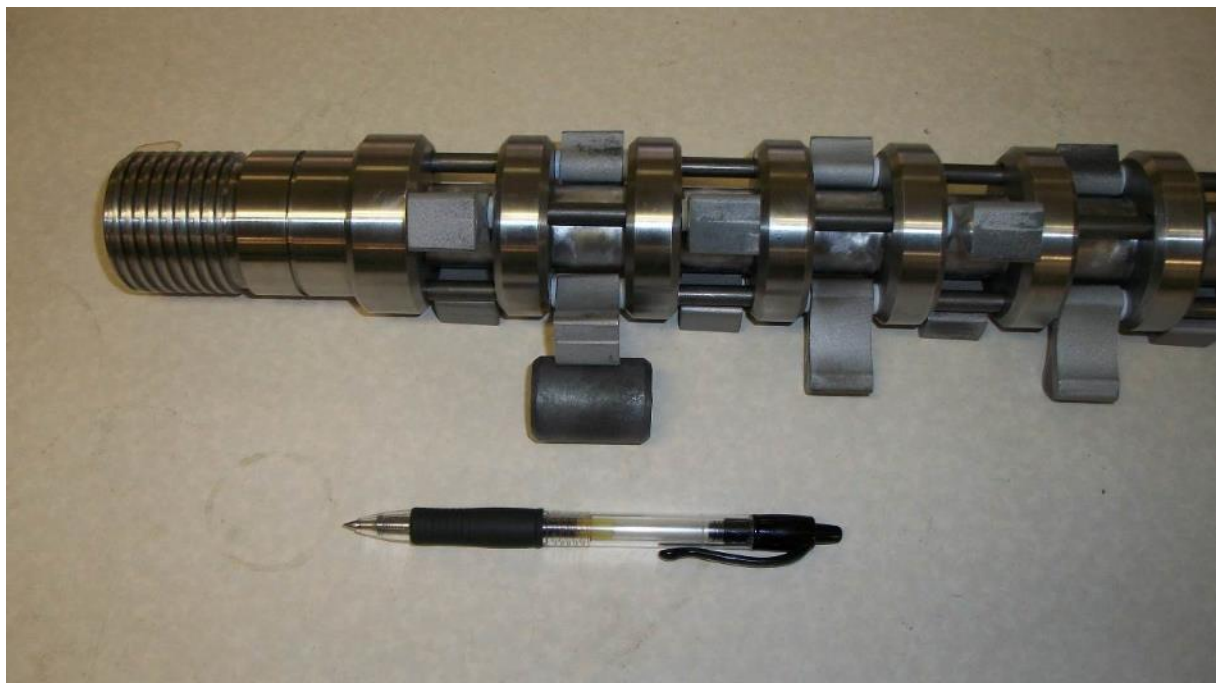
Close-up of the hammer and anvil assembly, showing how the hammers will strike the anvils in the actual source.
